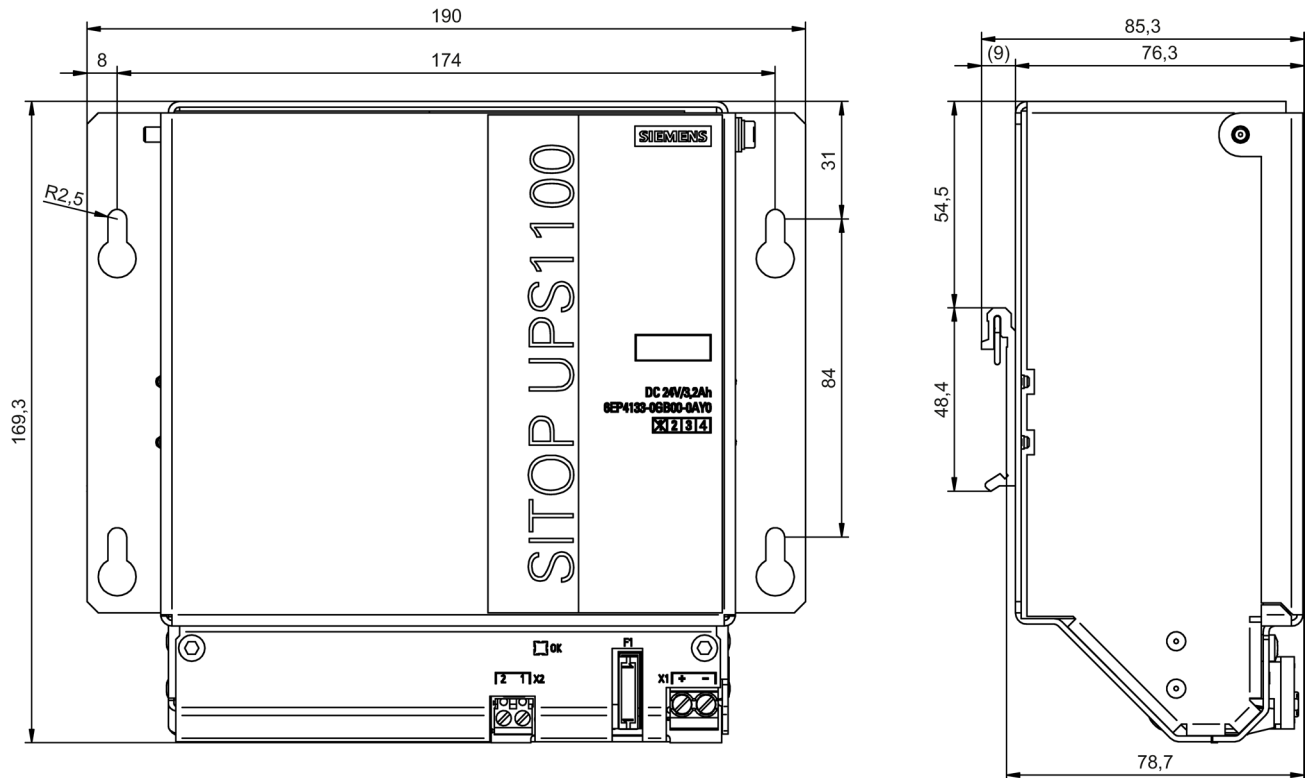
6EP4133-0GB00-0AY0 dimensioned drawing
